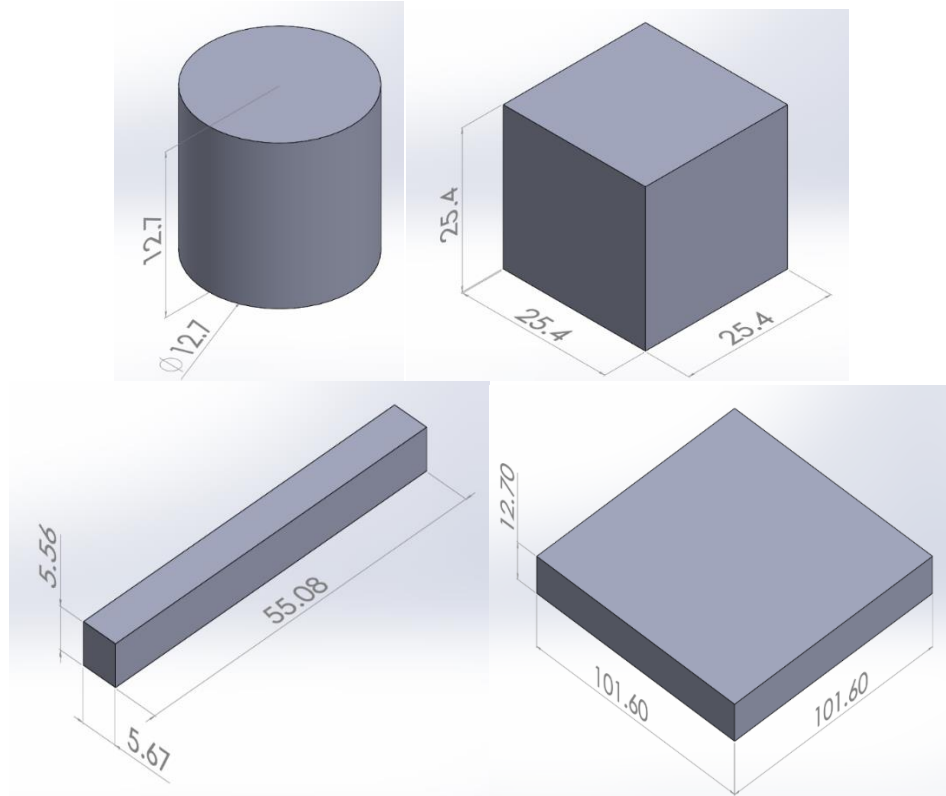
Actual CAD drawing of the geometries used in this research work: a) cylinder, b) cube, c) rectangle, and d) plate. Dimensions are given in millimeters.
